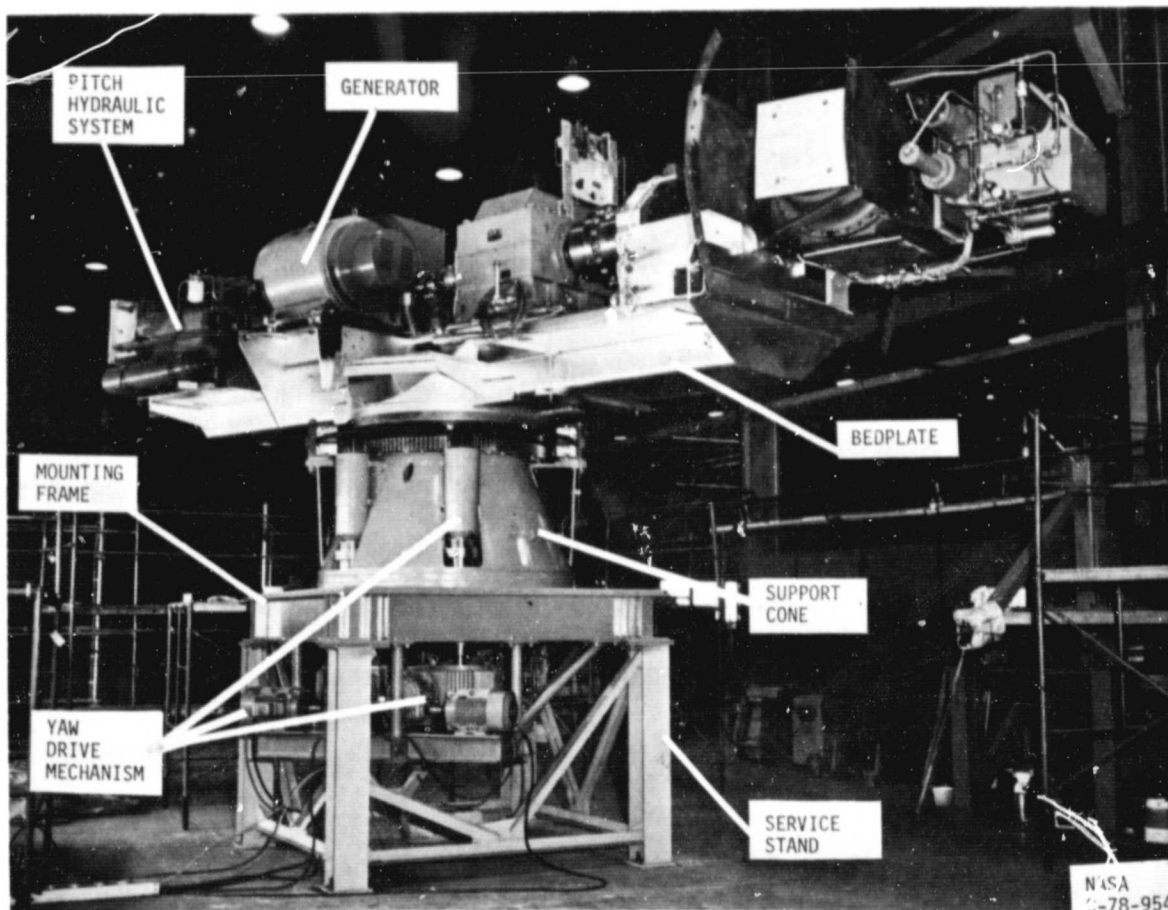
Components of MOD-OA Wind Turbine Assembly
